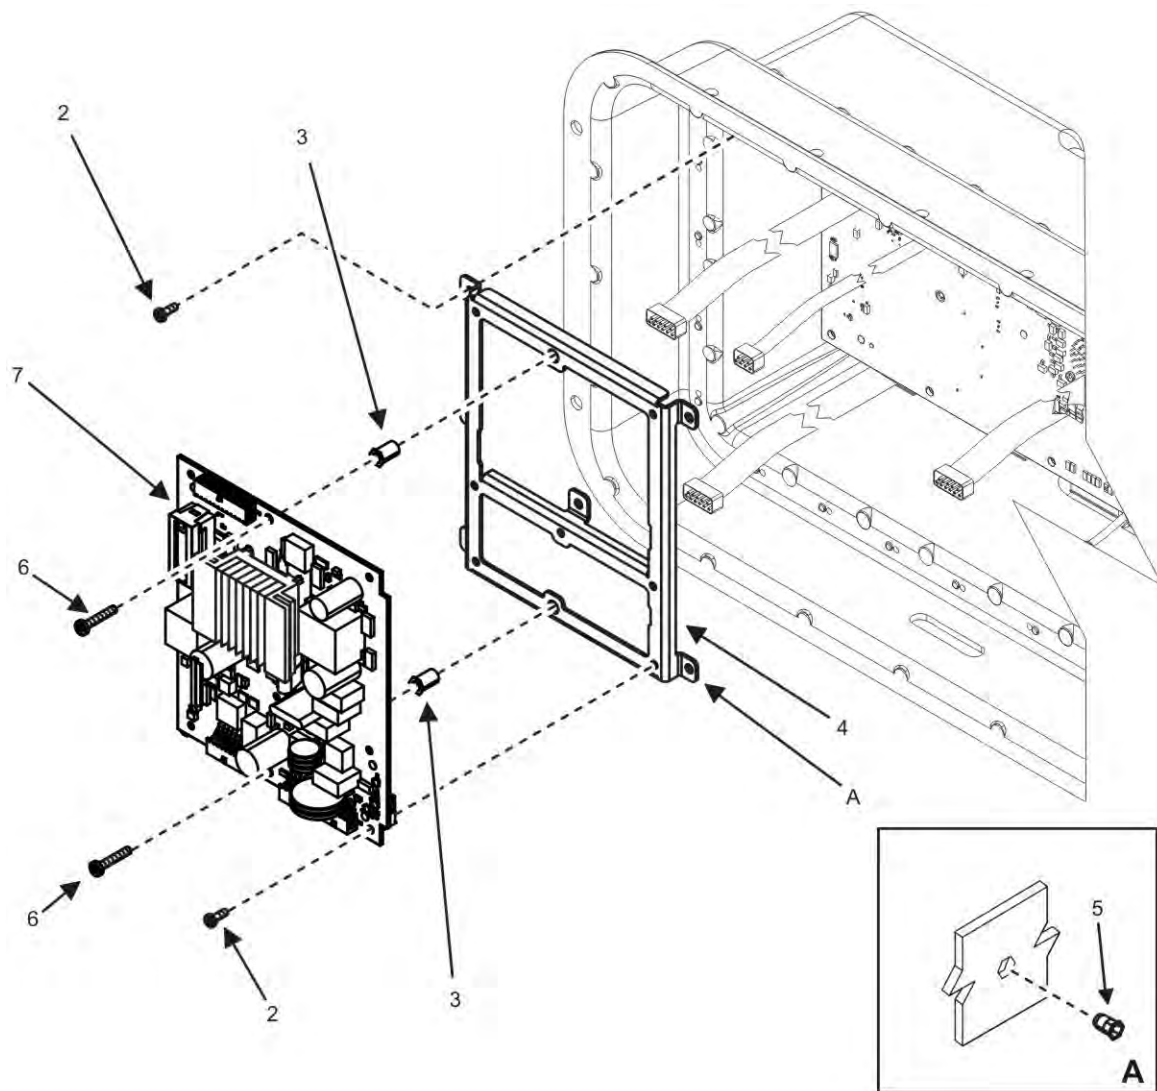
DCS Enclosure Assembly (Sheet 2 of 3).
